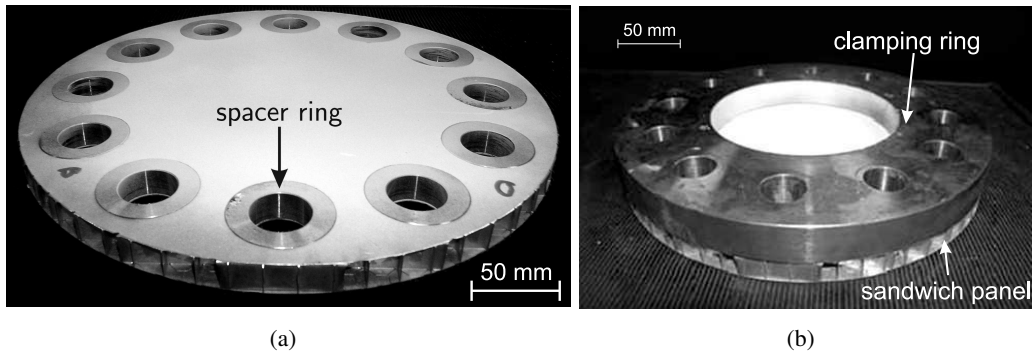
AISI 304 stainless steel panel with square honeycomb core. (a) Solid-ring spacers were employed to prevent core crushing while fastening the clamping ring. (b) A steel ring was employed to clamp the sandwich panel to the anvil tube with 12 screws. The test panel shown above is 305 mm in diameter and 13.97 mm thick.
